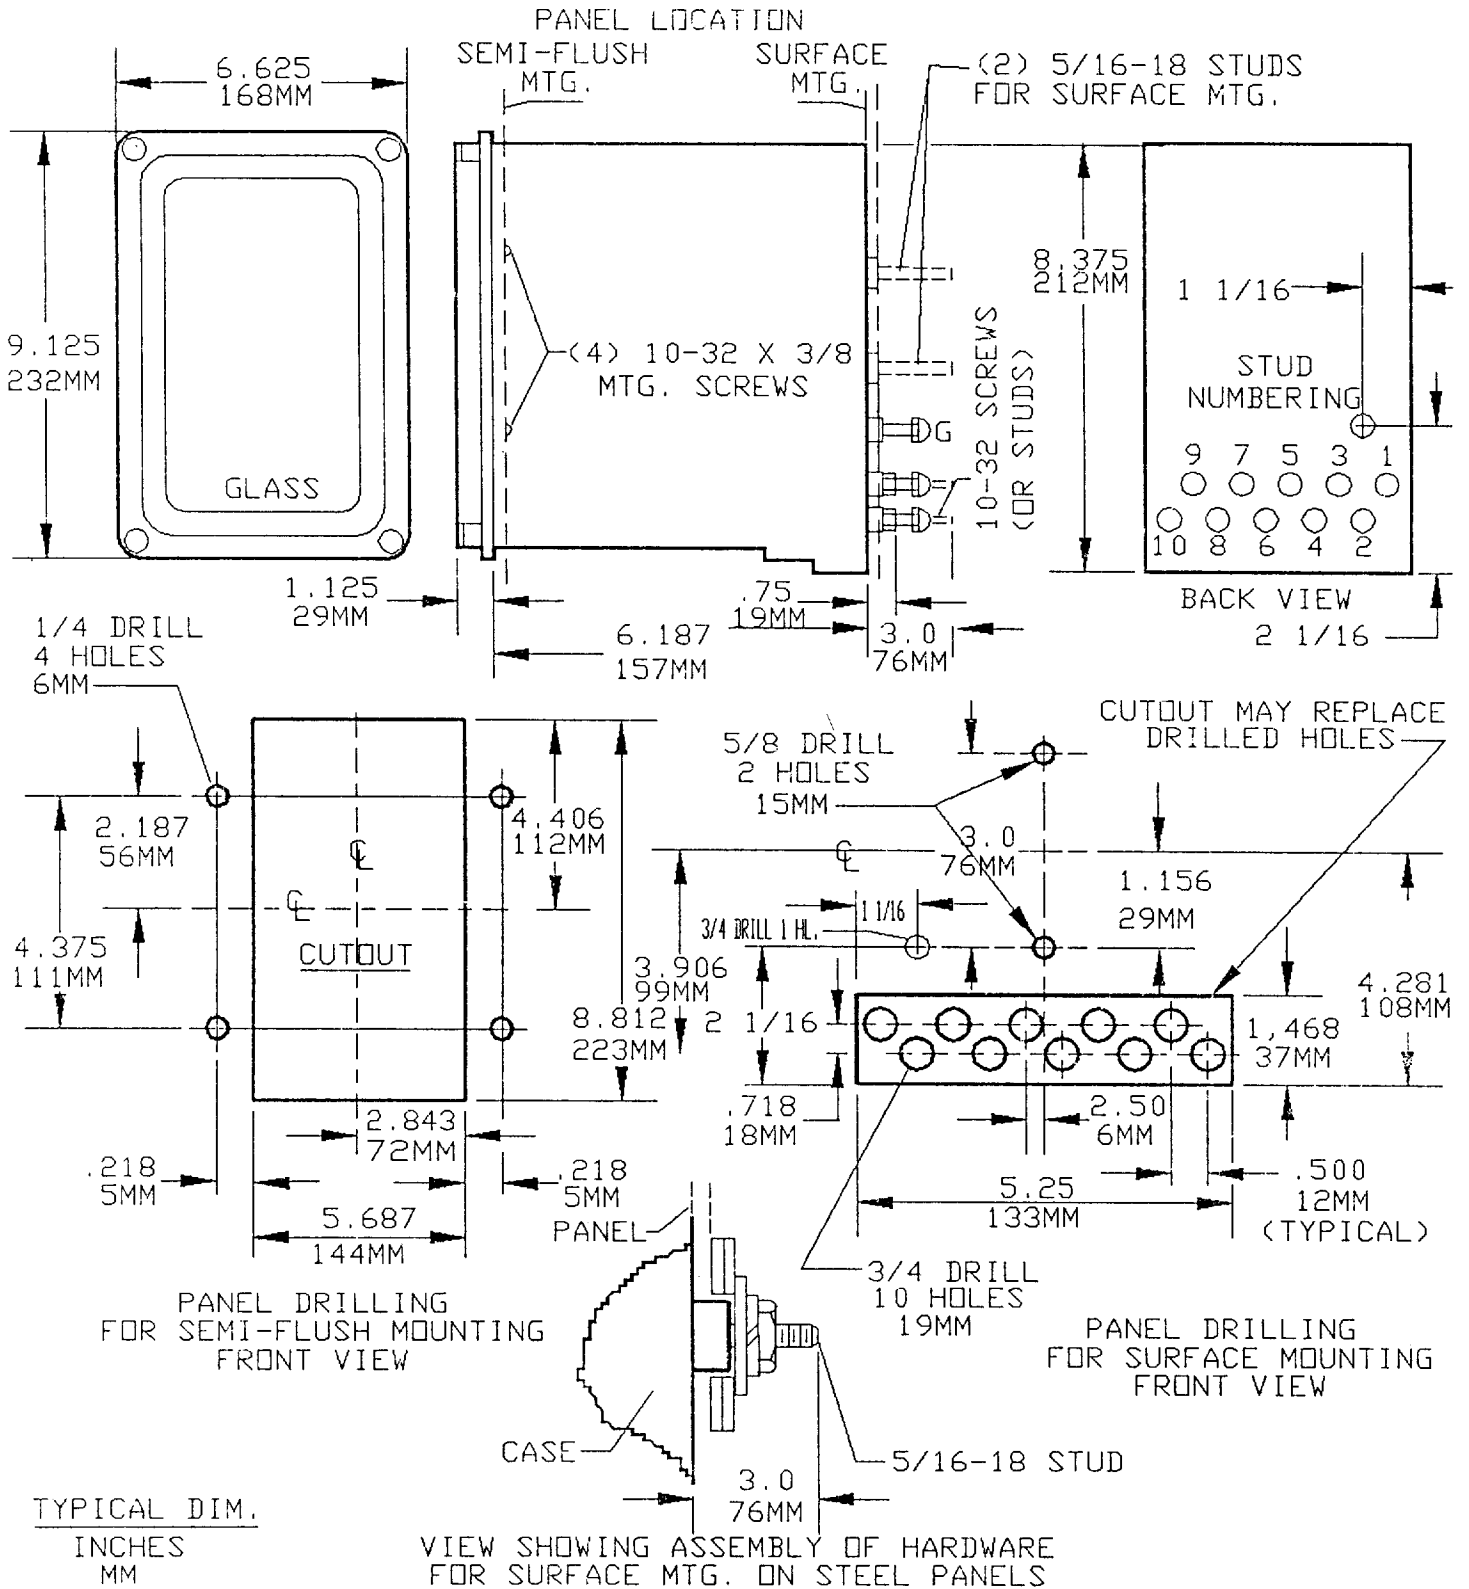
(0285A5392) Outline and Mounting Dimensions for the SAM201-206
